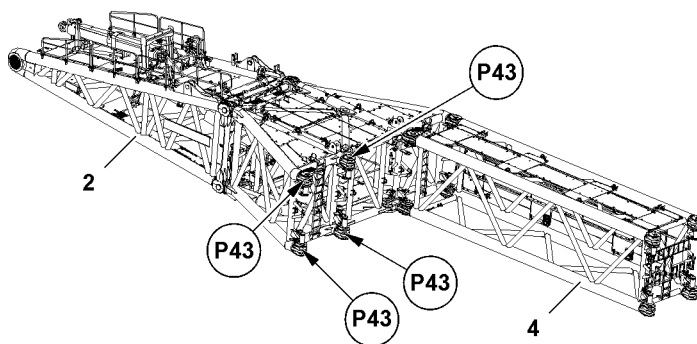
Assembling the Li-intermediate sections on the P-adapter - Pin points for the second section leg
